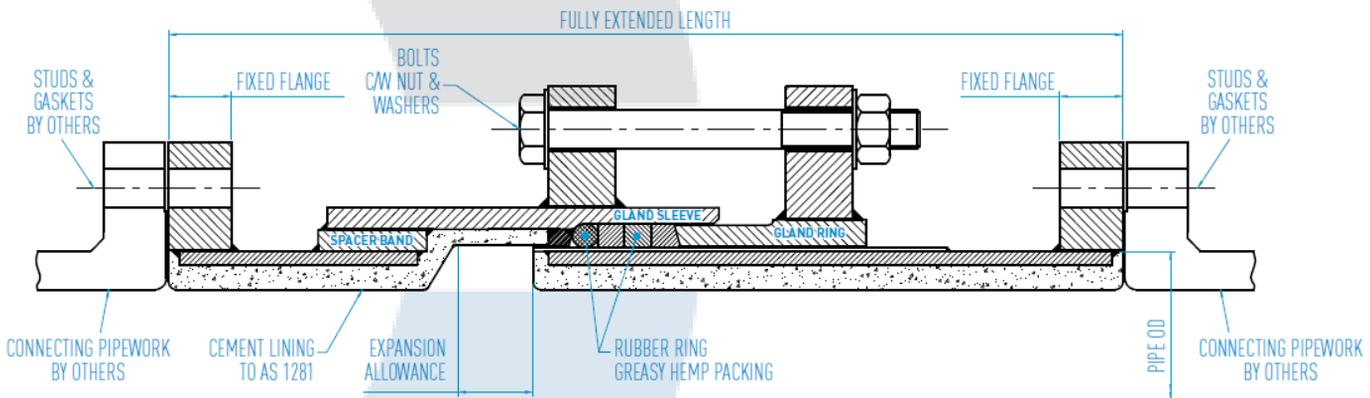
EXPANSION JOINT – FLANGE CONNECTION TYPE
